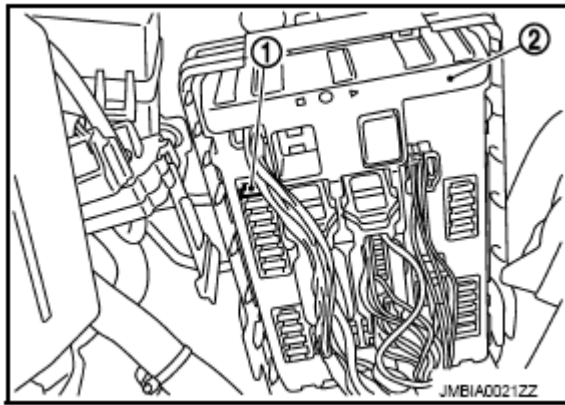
Locating Fuel Pump Fuse And IPDM E/R
